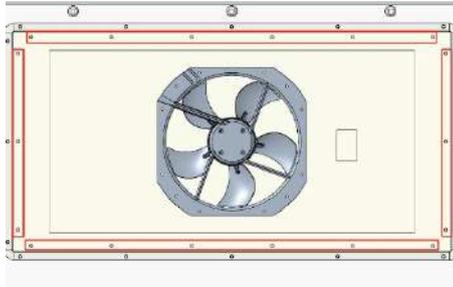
49 Fixing holes of the cooling fan mounting plate
